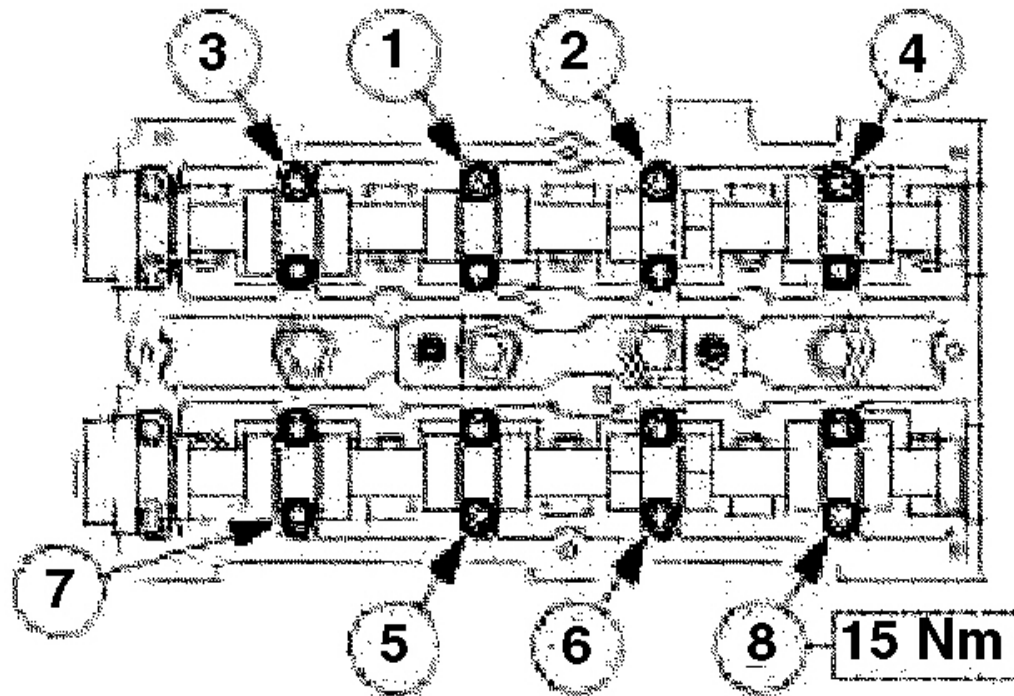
Identifying Cylinder Head Bolt Installing Sequence
